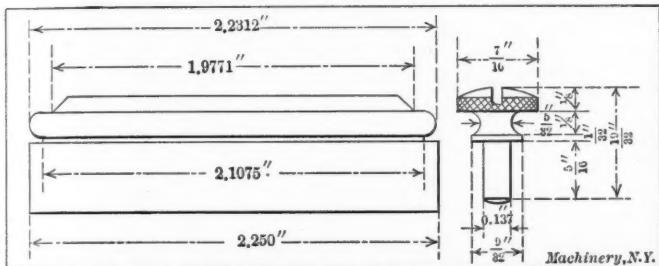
Dimensions of Work and Tool in the Practical Example Given
